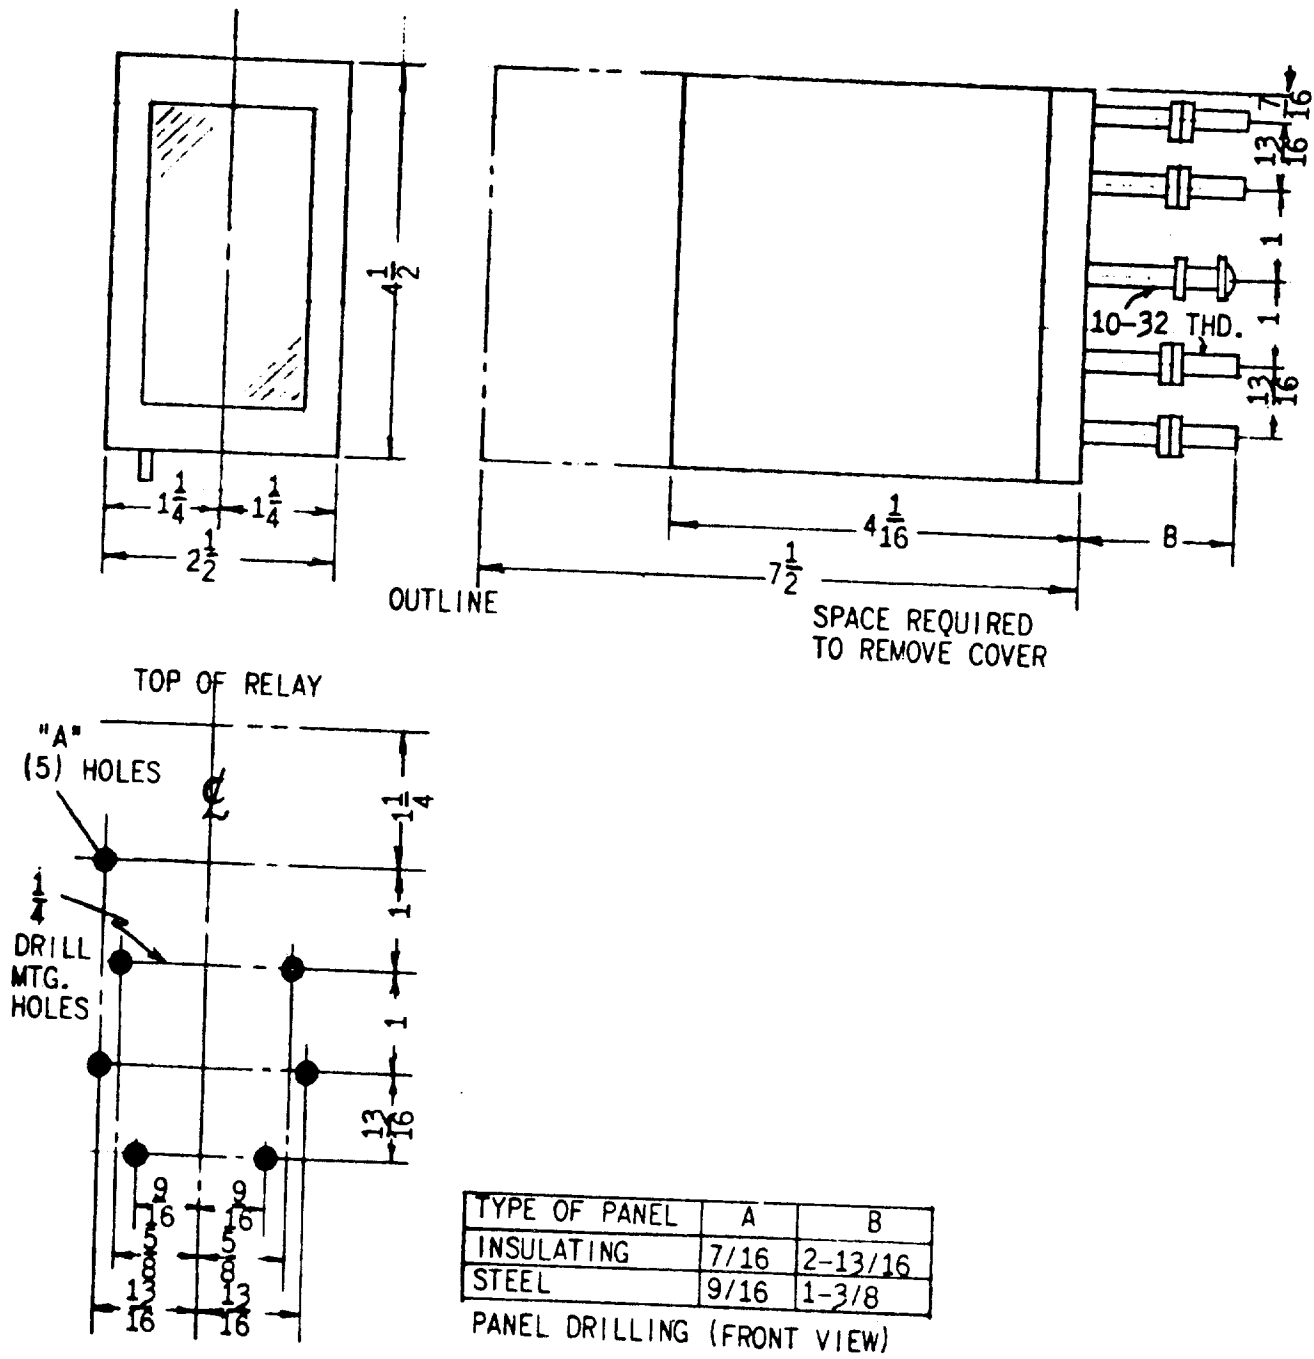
(0165A6003-3) Outline and Panel Drilling Dimensions for the Projection Mounted HAA16B Relay
